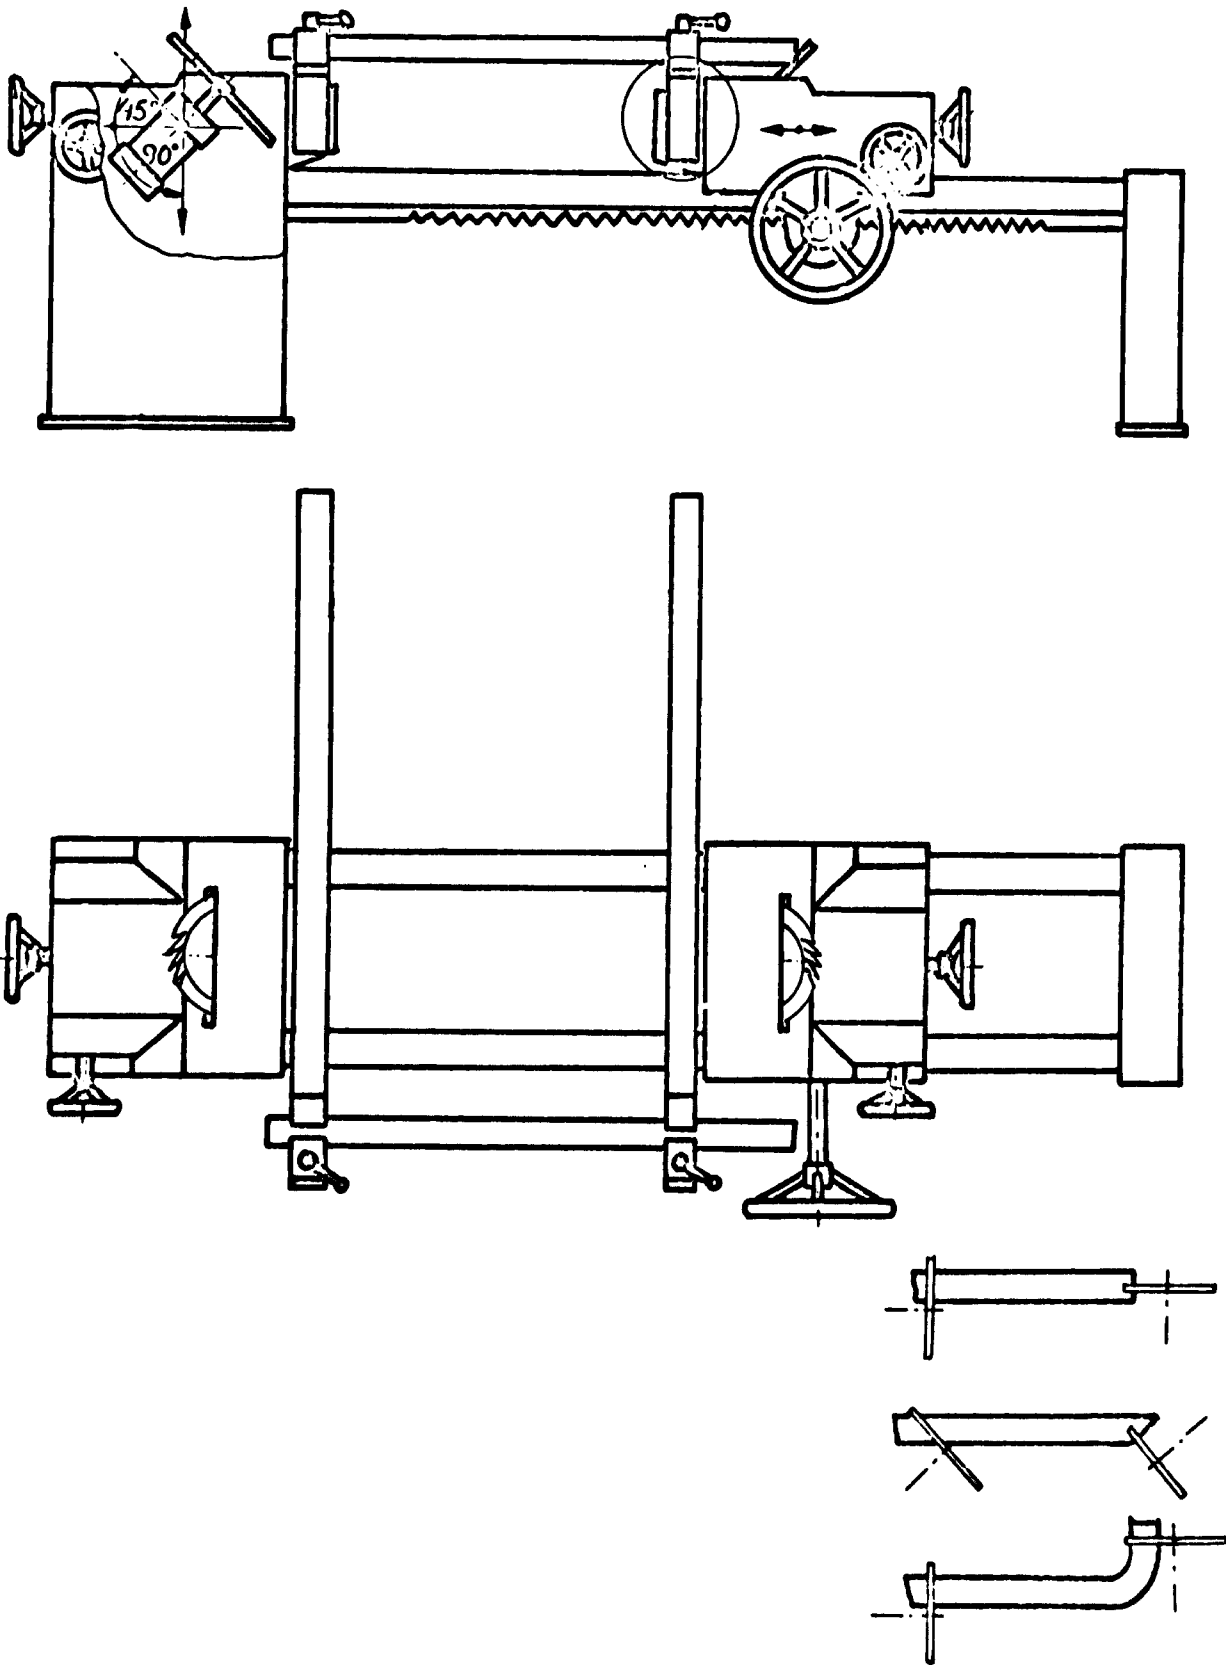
Figure X. Side and top views of a double-bladed trimming saw with tilting blades (possible cuts are shown at lower right)
